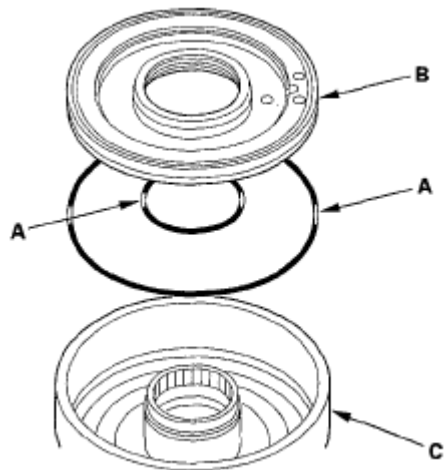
Identifying O-rings On 2nd, 3rd, 4th, And 5th Clutch Piston
